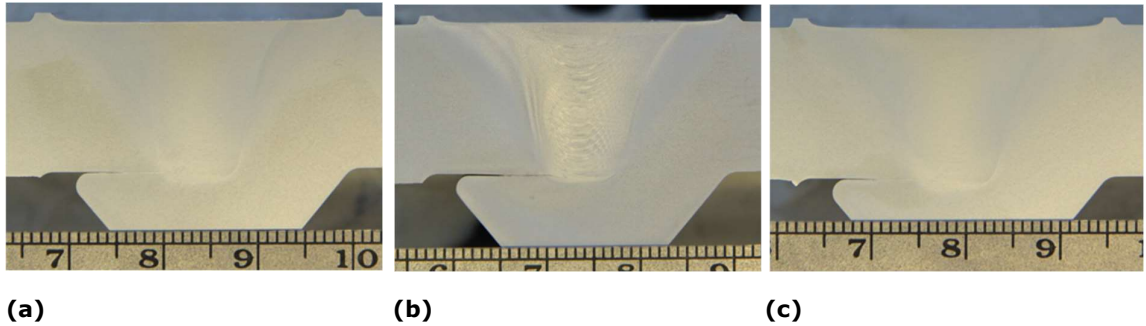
2_Gap_17mm weld macrography at (a) start, (b) middle, and (c) end
